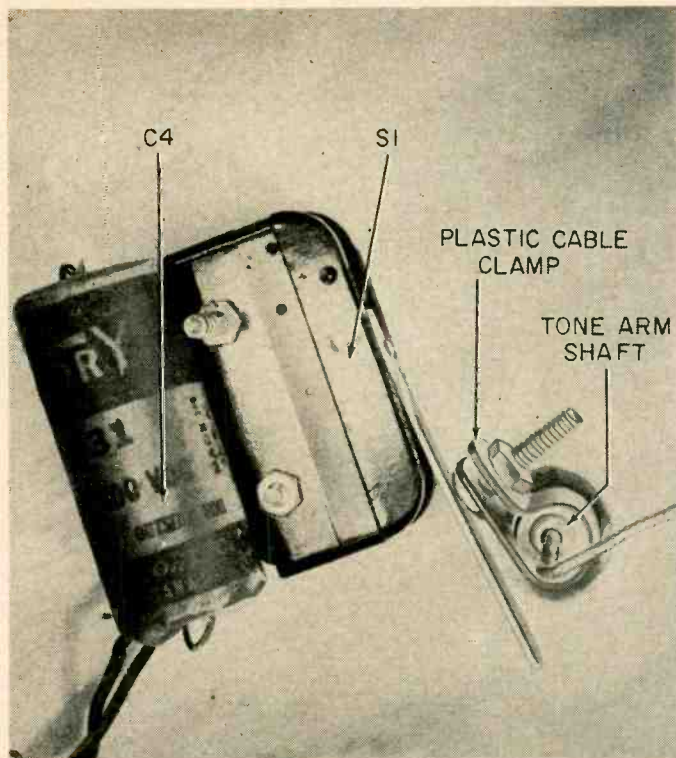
Detail of trip mechanism. Screw head actuates the switch.
